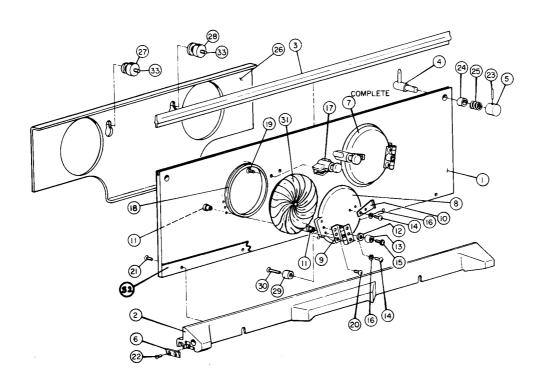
PARTS LOCATION DIAGRAM, ACCESS PANEL ASSEMBLY
